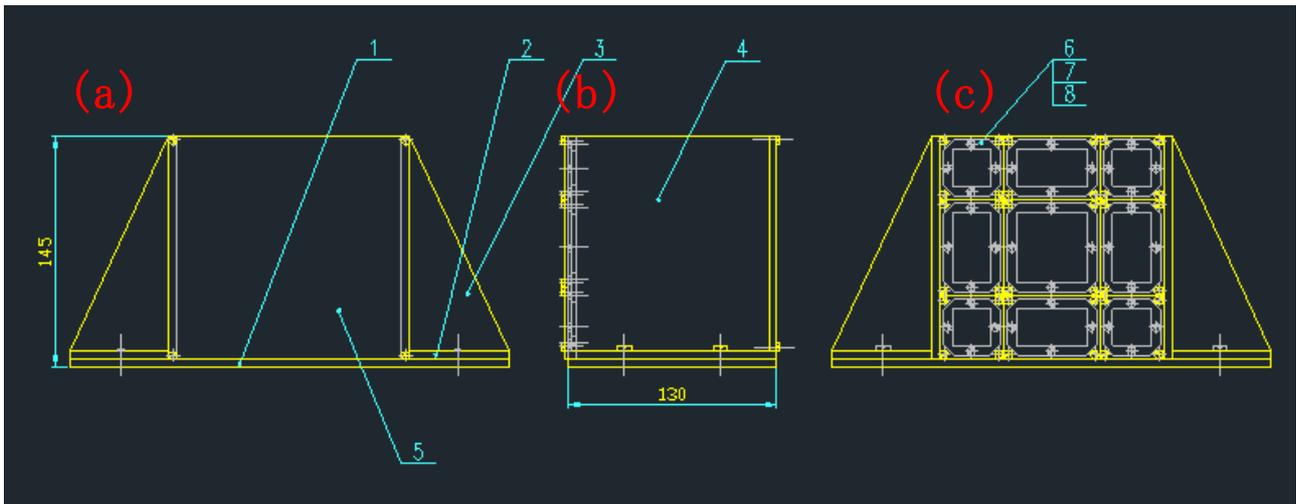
Drawing of the crystal array holder (a) front view, (b) side view, and (c) backside view.
